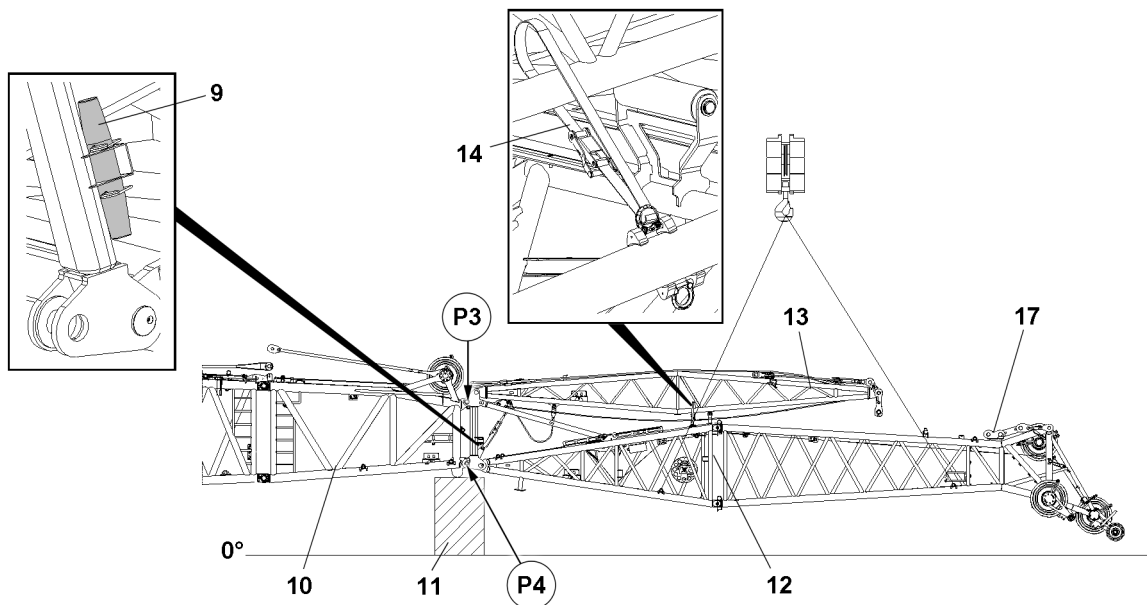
Pinning the F-jib 12 m on the F-connector head
